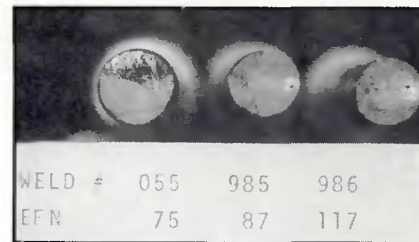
Fractured tensile specimens of Alloy 255 weld (055) and Alloy 2205 welds (985 and 986), all having high ferrite. The Alloy 255 weld was cracked before tension testing. The Alloy 2205 welds developed coarse crystalline facets on their fracture surfaces during testing
